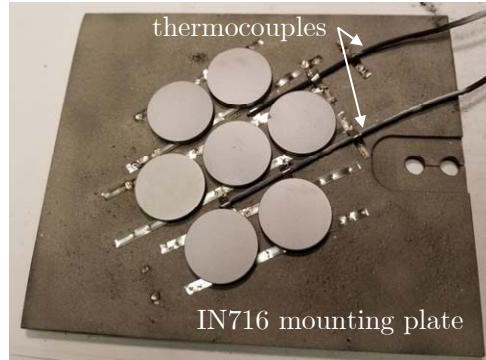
Bond-coated samples spot-welded to a mounting plate prior to PS-PVD coating.
